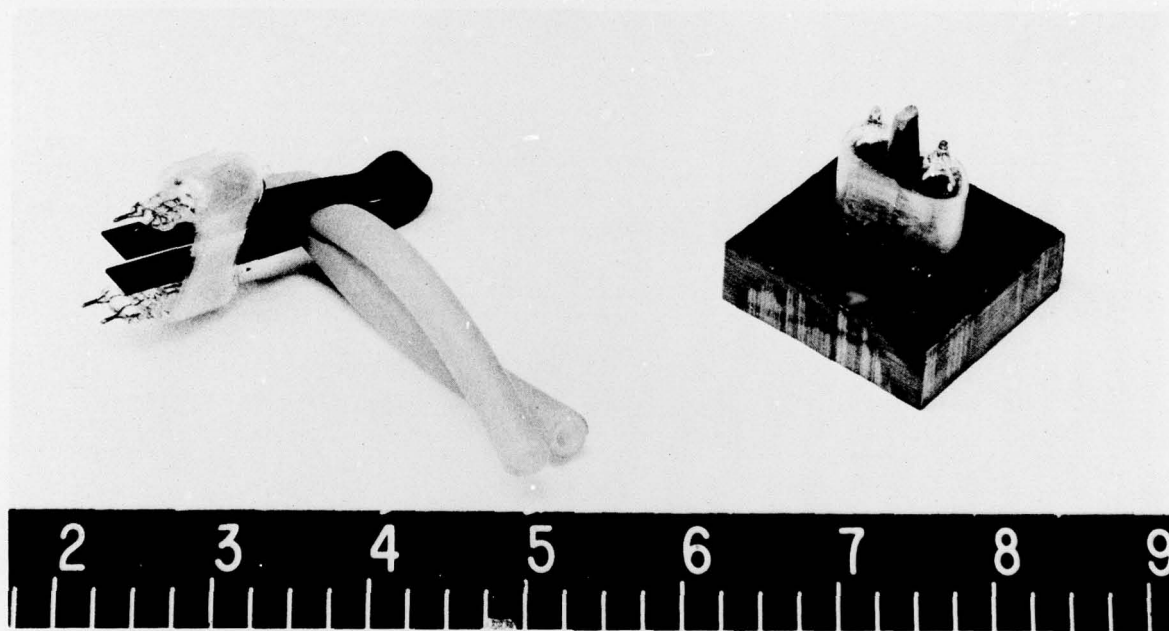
A cocked trigger (left) and the jig setup for wrapping the polyethylene strip (right)
